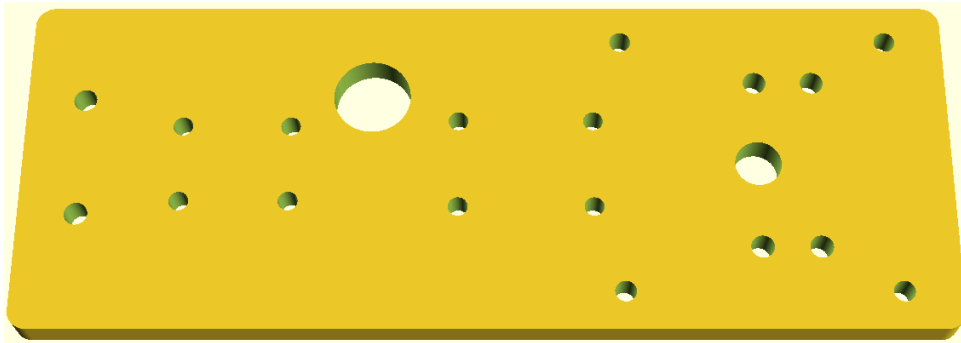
The intermediate part connecting Y-axis to X-axis on the motor side.
